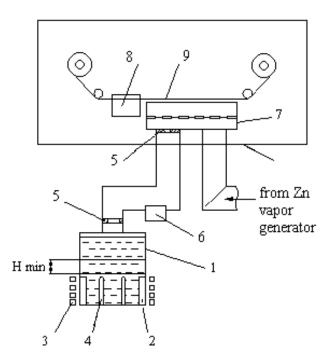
Layout of the Mg and Zn deposition machine. 1-magnesium crucible; 2-ribs; 3-inductor; 4-capsules with thermocouples; 5-throttles; 6-device of vapor pressure measurement; 7-vapor distributor; 8-plasma device for strip treatment; 9-steel strip; 10-vacuum chamber.
